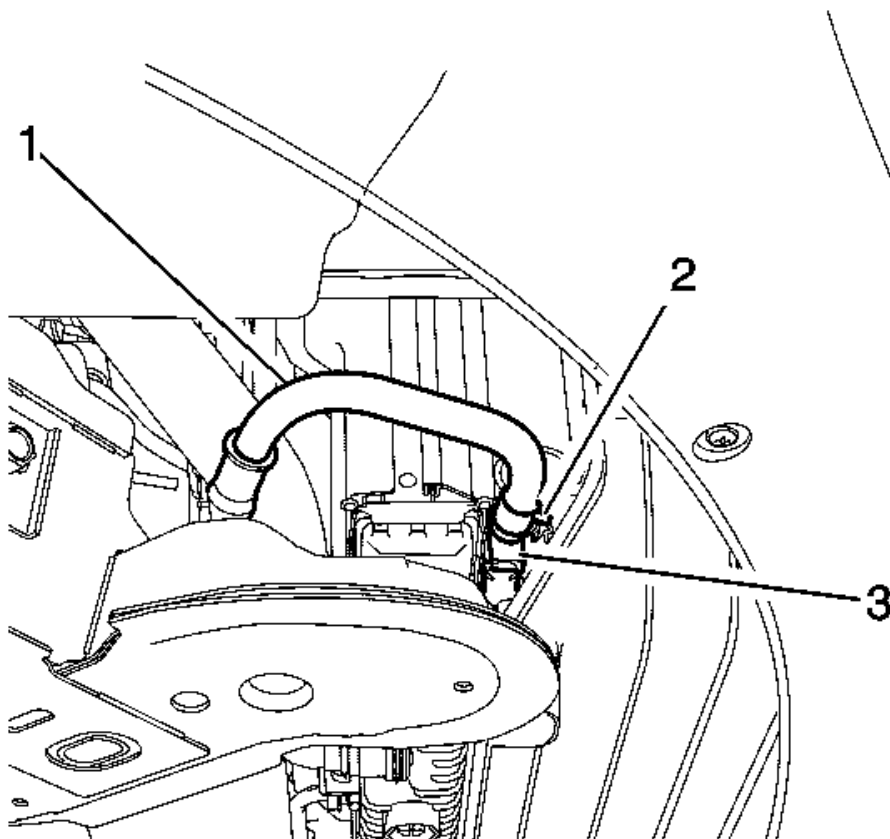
View Of Power Steering Cooler & Power Steering Gear Outlet Pipe/Hose With Spring Clamp
